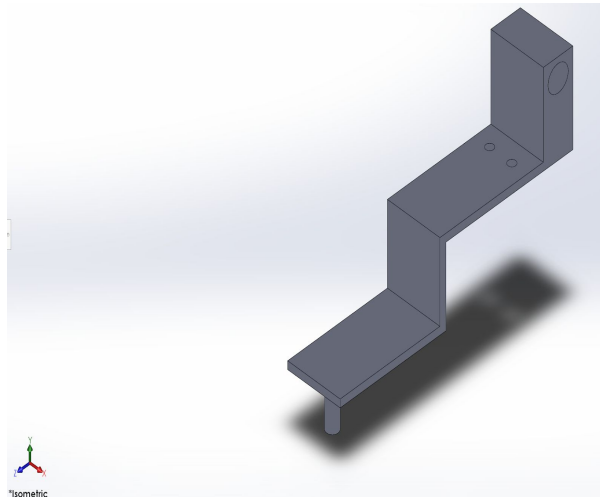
Base Plate CAD Drawing, Isometric View
